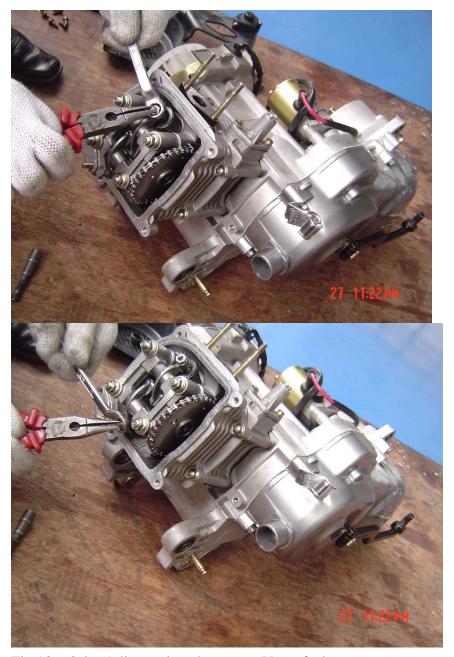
a & b. Adjust valve clearance. Use a feeler guage. Inlet valve .008" Outlet valve .010. Others have reported better results with a little wider clearance.
